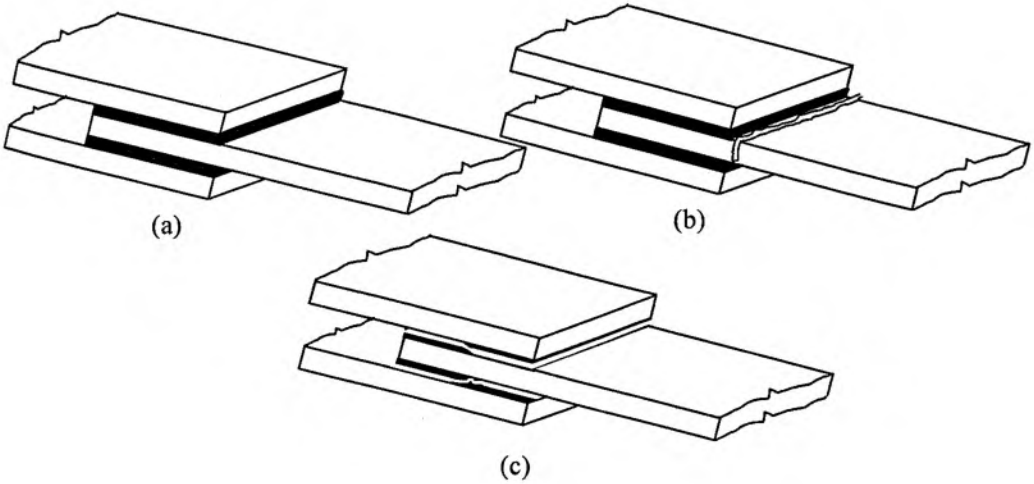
Typical failure modes in adhesive bonded DLJ; (a) intact joint, (b) net-section adherend failure and (c) failure due to adhesive failure.
